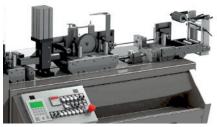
Central adjustment of the guide rollers optional motor driven version available
